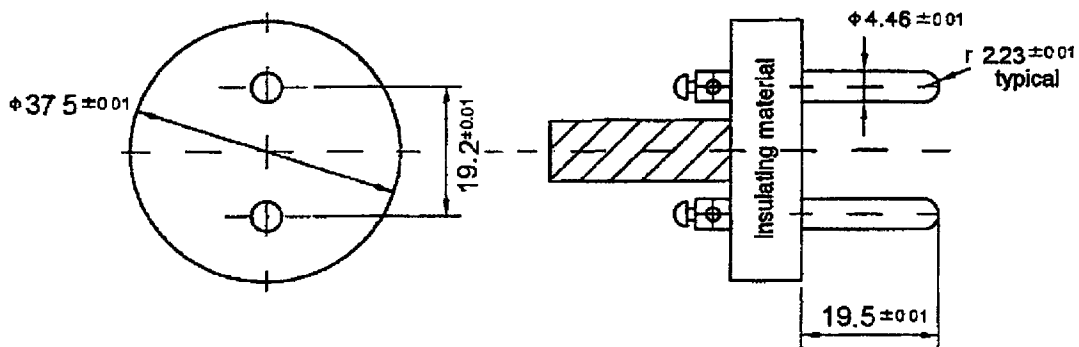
Gauge for checking unintentional contact in a socket-outlet
